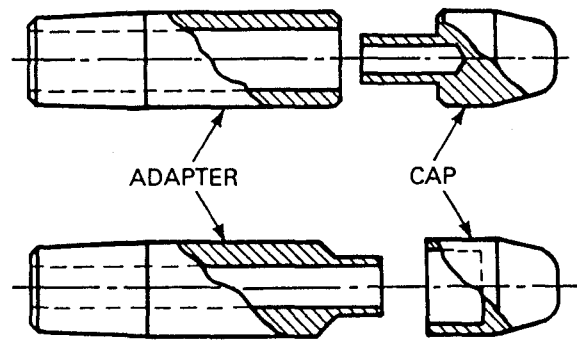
Male and Female Designs of Two-Piece Spot Welding Electrodes
